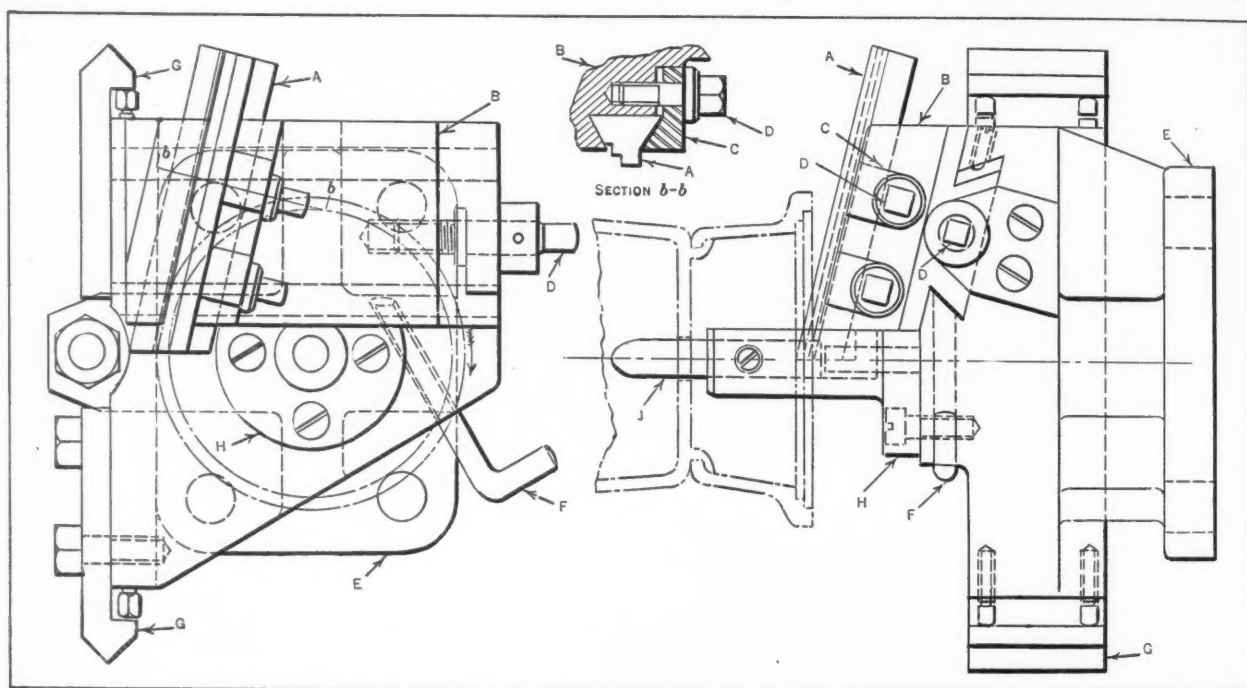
Finish Counter-boring Work Shown in Fig. 1, with End Cutting Form Tool
